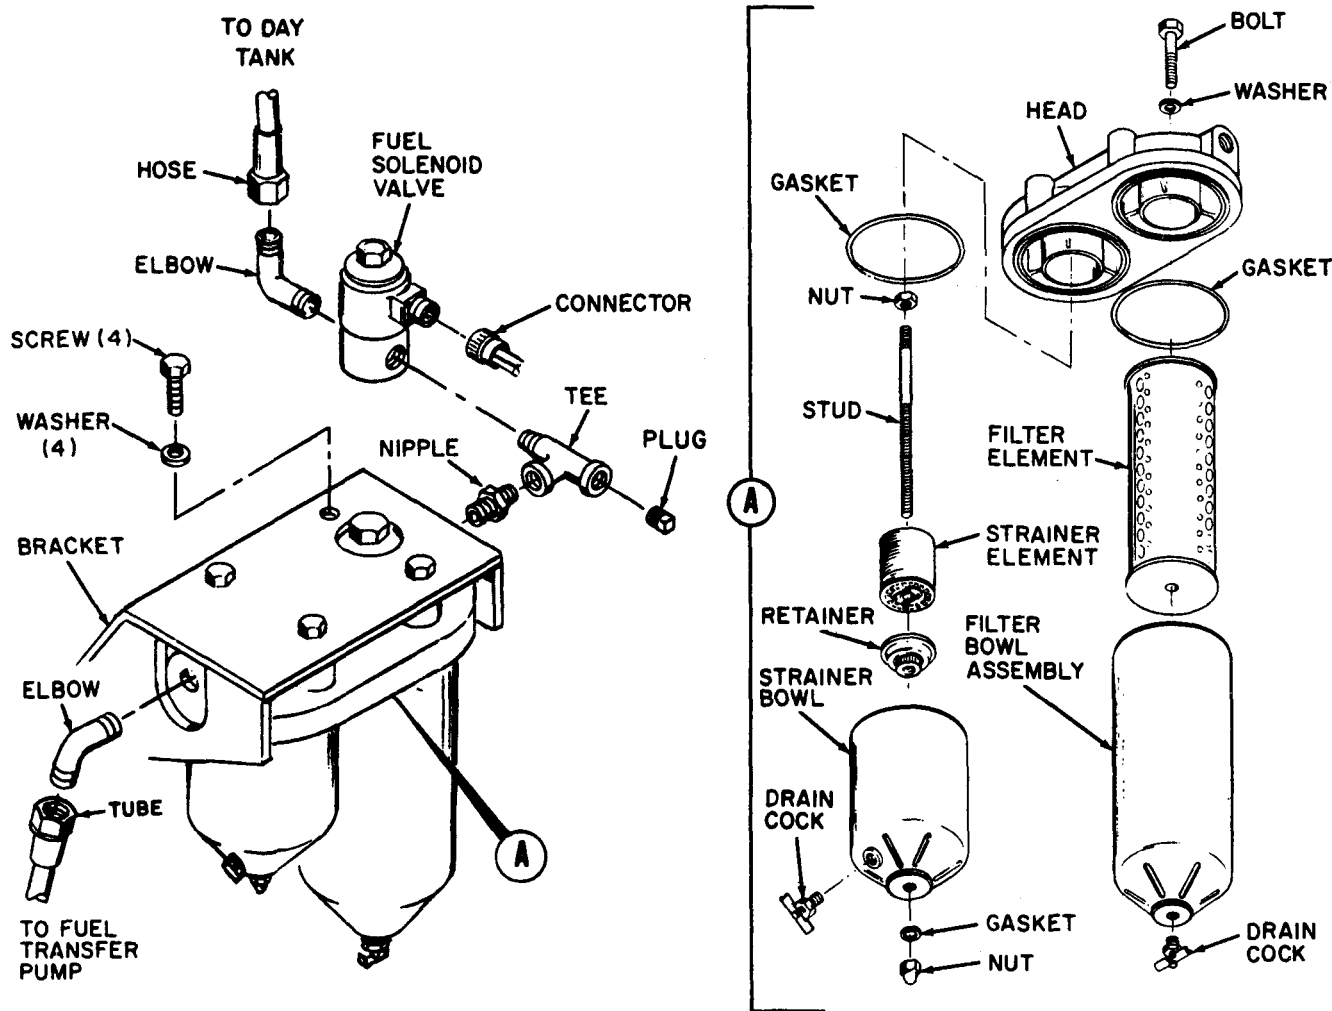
Fuel filter and strainer assembly and fuel solenoid valve, exploded view
